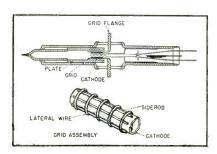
Cross-section of typical penciltube triode and enlarged view of conventional coaxial grid and cathode
